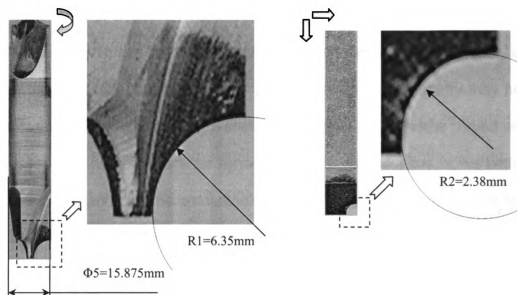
Images of endmill (left) and round-corner cutting tool (right).
